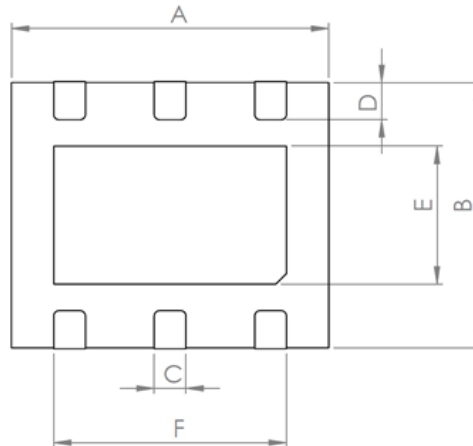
DFN-6 Package Dimensions (bottom view)
